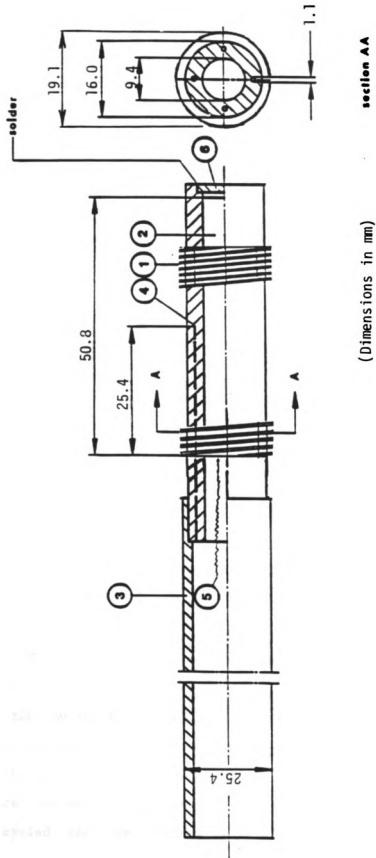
Finned tube test section. Legend: 1-Fins, 2-Cartridge Heater, 3-Brass Holder, 4-Thermocouple Well, 5-Electrical Leads, 6-End Plug.
